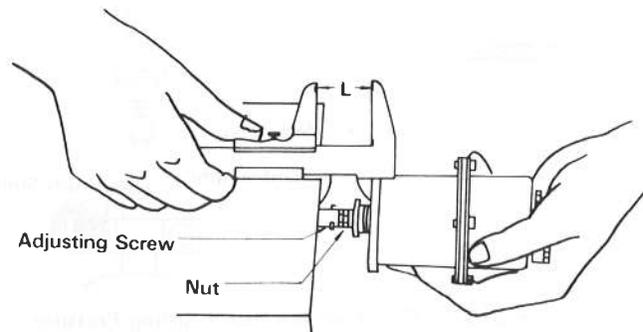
Adjusting the Plunger Movement (Adjusting Screw Type)
